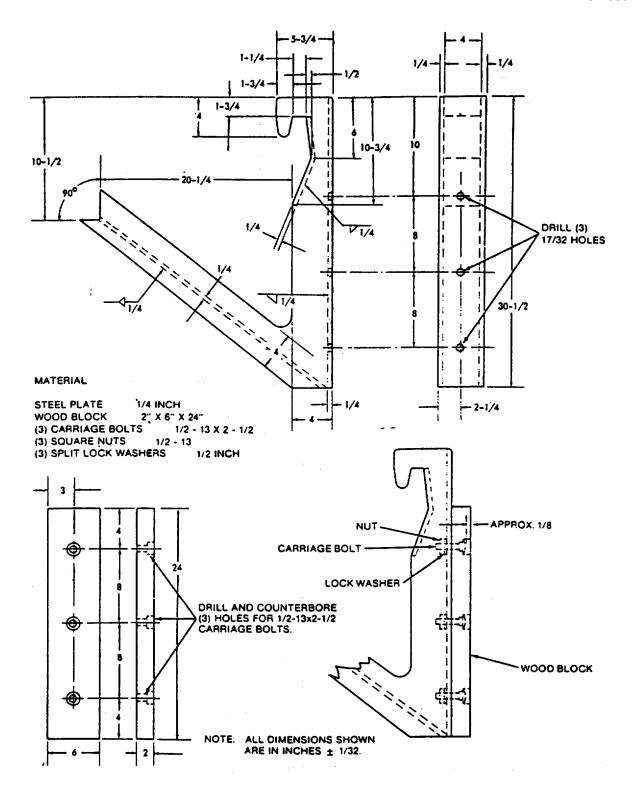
Dimensional Drawing for Fabricating Improvised Recoil Mechanism Exercising Bracket (M62 Wrecker)
